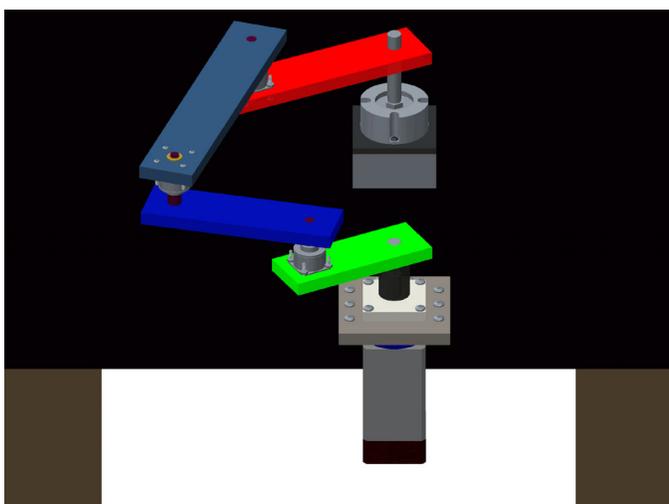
RMG: CAD and PROTOTYPE (view 2).
